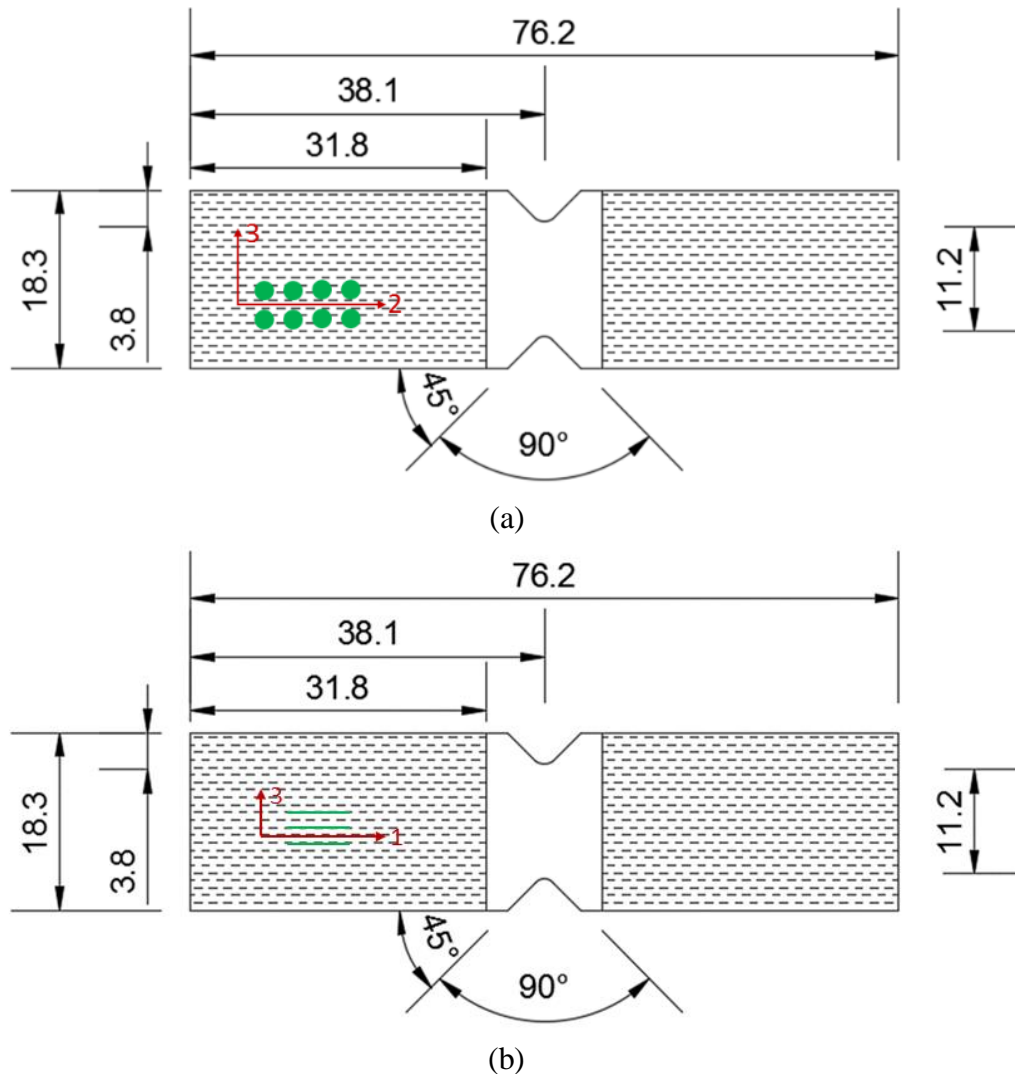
Nominal Specimen Dimensions and Layout (a) 2-3 Plane Shear Specimen and (b) 1-3 Plane Shear Specimen (All Dimensions in mm)
